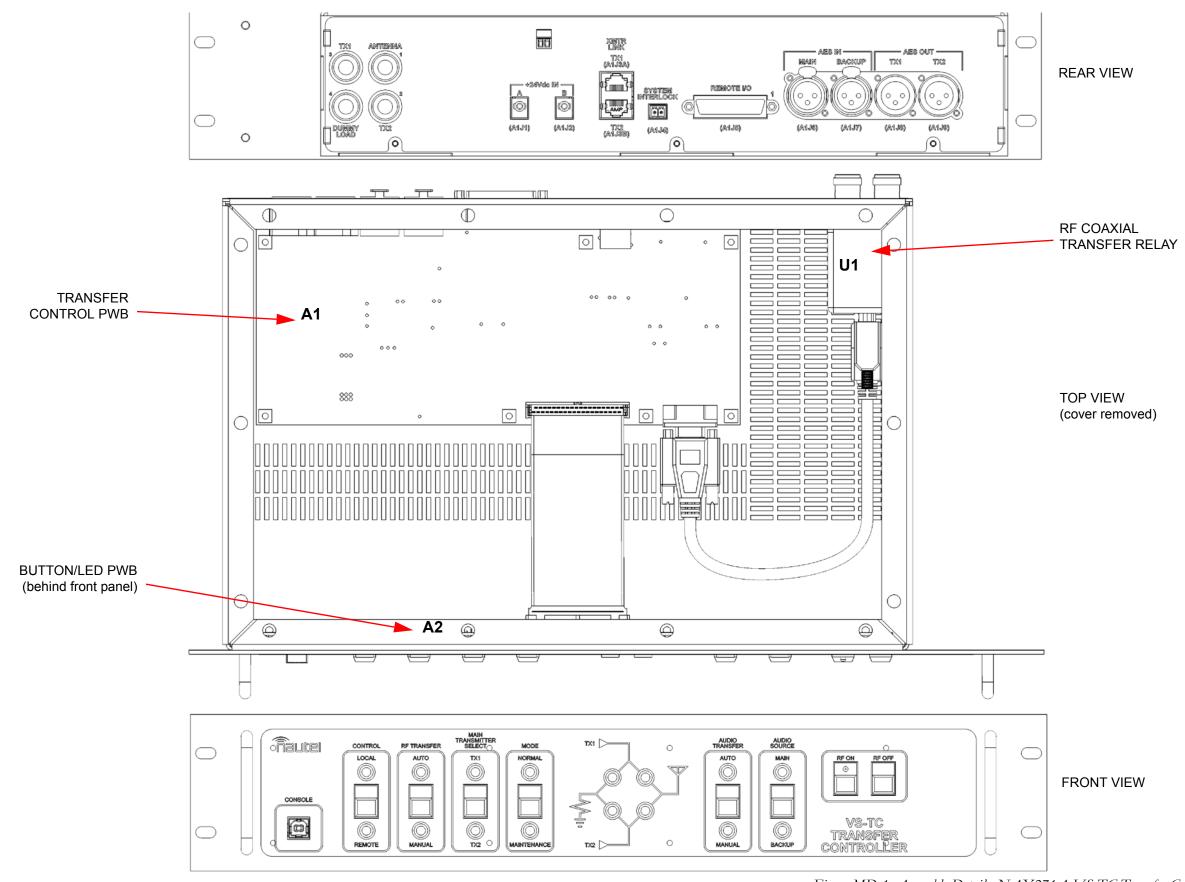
Assembly Detail - NAX271A VS-TC Transfer Controller
